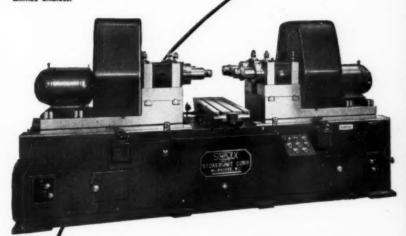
Here the finish boring machine is shown in operation. The work has been brought within rough tolerances in a preliminary operation and now, positively located is undergoing the final boring operations which will make it available for the rigid inspection tests which the part must meet before being passed to assembly.
